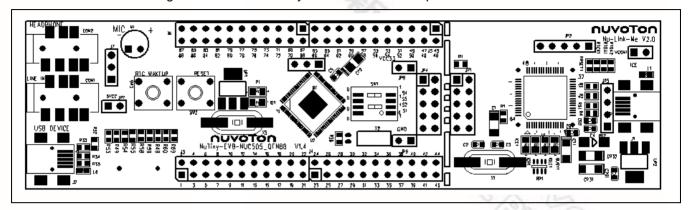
NuTiny-SDK-NUC505 PCB Placement
